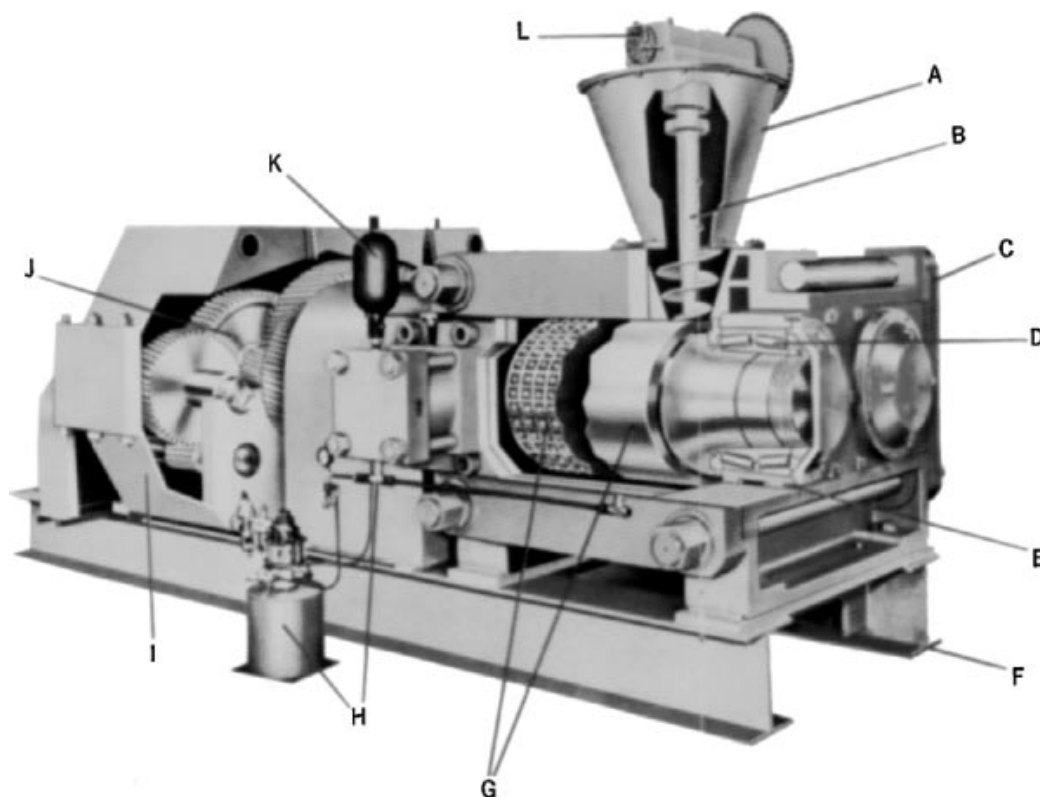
Cutaway view of a briquetting-compacting machine. A, predensifying feeder; B, feeder screw; C, machine housing; D, antifriction bearing; E, machined bearing block; F, base frame; G, pocketed or corrugated rolls; H, hydraulic system; I, speed reducer; J, gears; K, hydraulic accumulator; and L, feeder drive. Courtesy of Hosokawa Bepex Corp.
